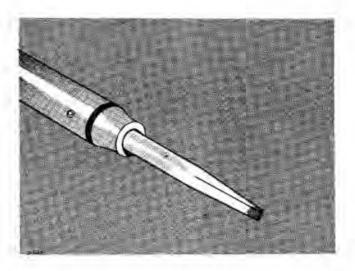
Soldering iron tip properly shaped and tinned.
